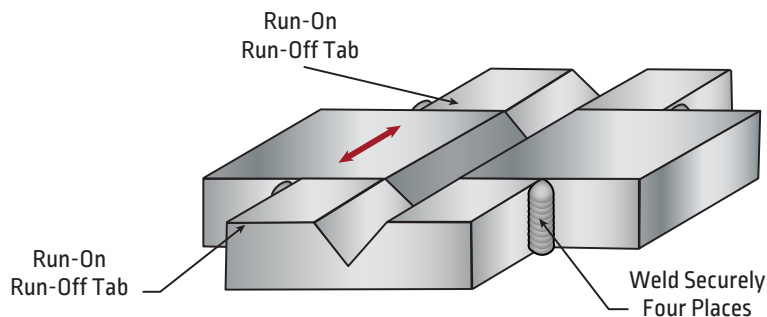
Method 1: Run On/Off Tabs Should Be Prepared with the Same Joint Geometry as the Plate to be Welded and Similar in Thickness.
